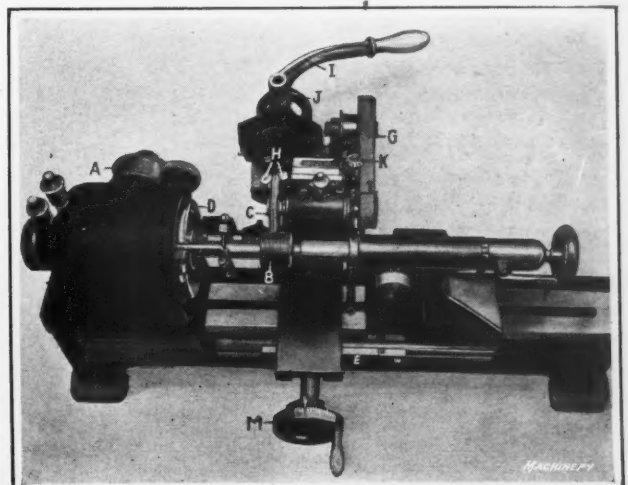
Close View of Thread Gage Grinding Machine shown in Fig. 1
